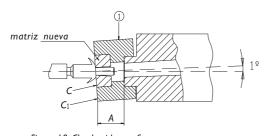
Chuck with new form Abbildung 10: Werkzeughalterung mit neuem Werkzeug
